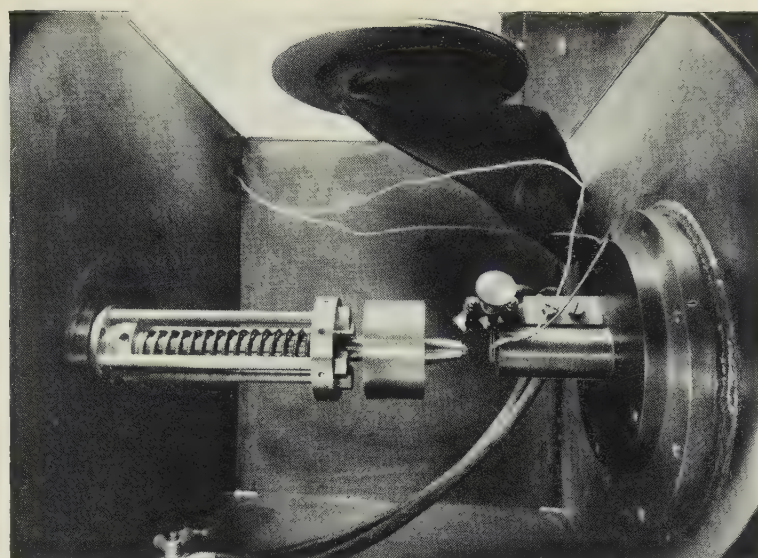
The Impact-Loading Device. A test-piece is clamped in position ready for welding.
